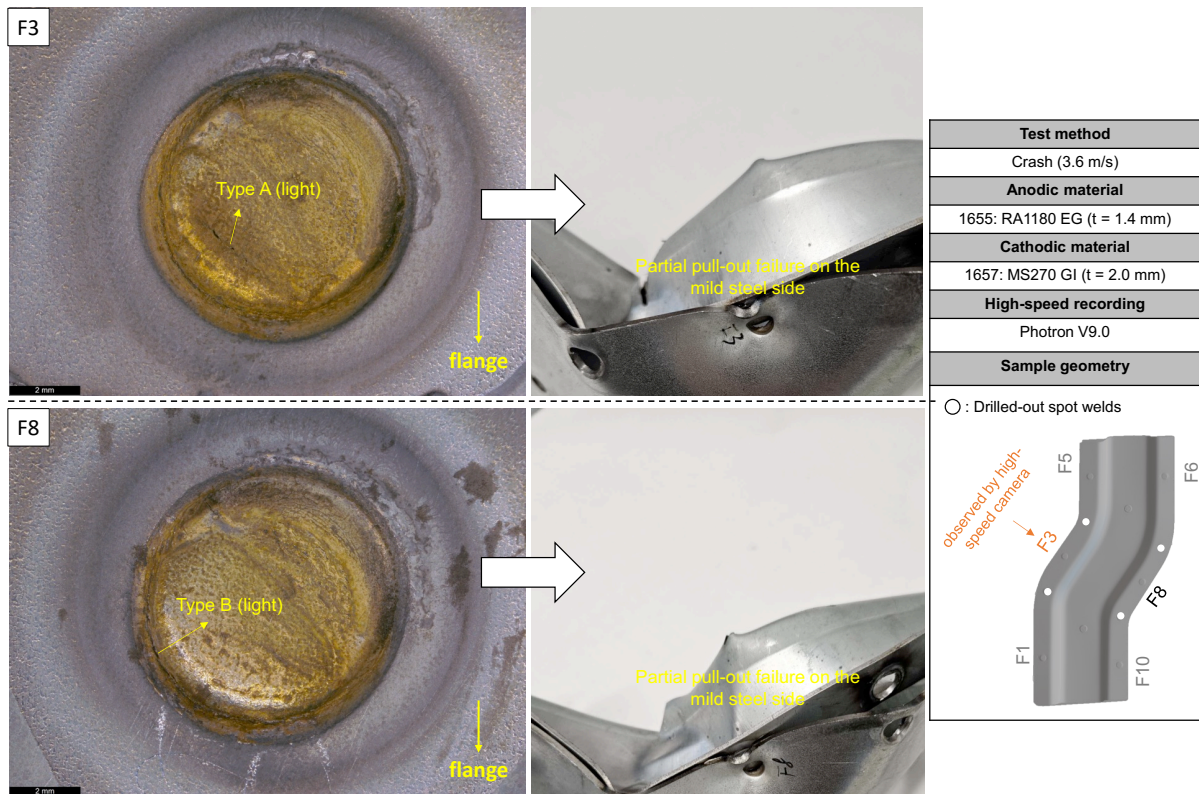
Spot weld failure in sample 56 (MTC1)
